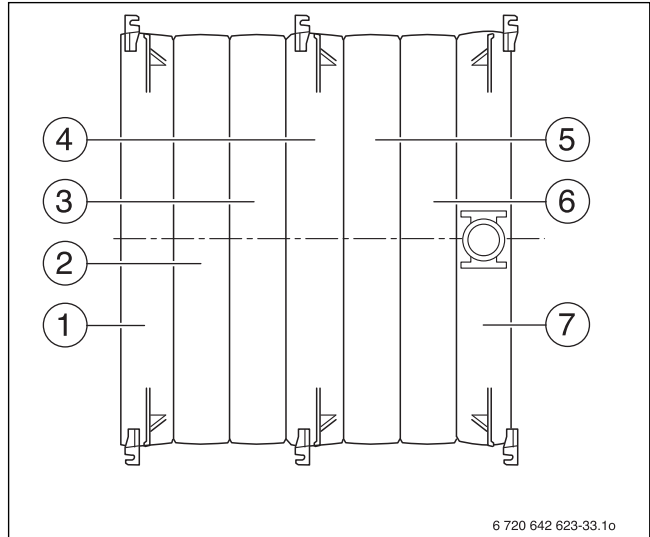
View from above: boiler block (7 boiler sections) with brackets
